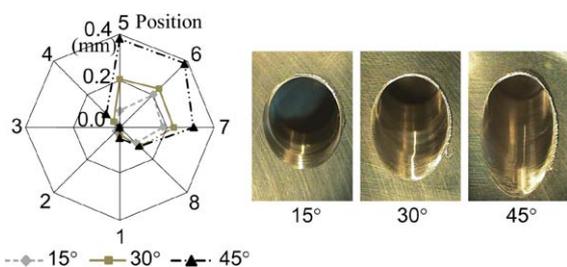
Result of deburring experiment with Burr-Off tool with Al6061 under the following conditions: inclination angle of 15°, 30°, and 45°; spindle speed of 700 rpm; feed rate of 28 mm/min; diameter of 9 mm; with coolant.
